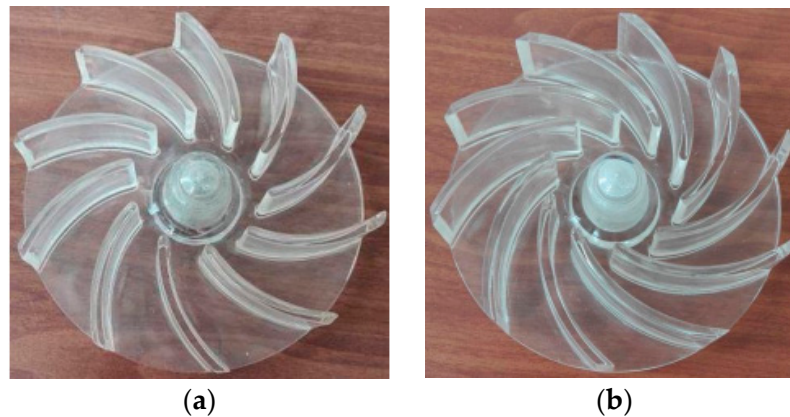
Impeller of open-design vortex pump. (a) Impeller 1; (b) Impeller 2.
